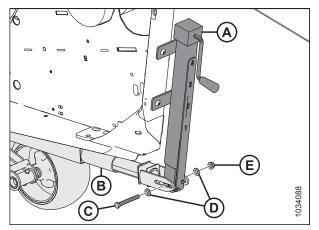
Jack and Outboard Wheel Assembly – View from Rear
